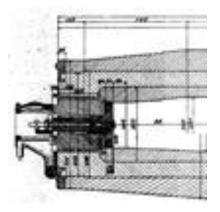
Breech of Armstrong 6-inch M.1883 showing attachment to 'B' tube (Crawford, Mitiuckov, 2016)
